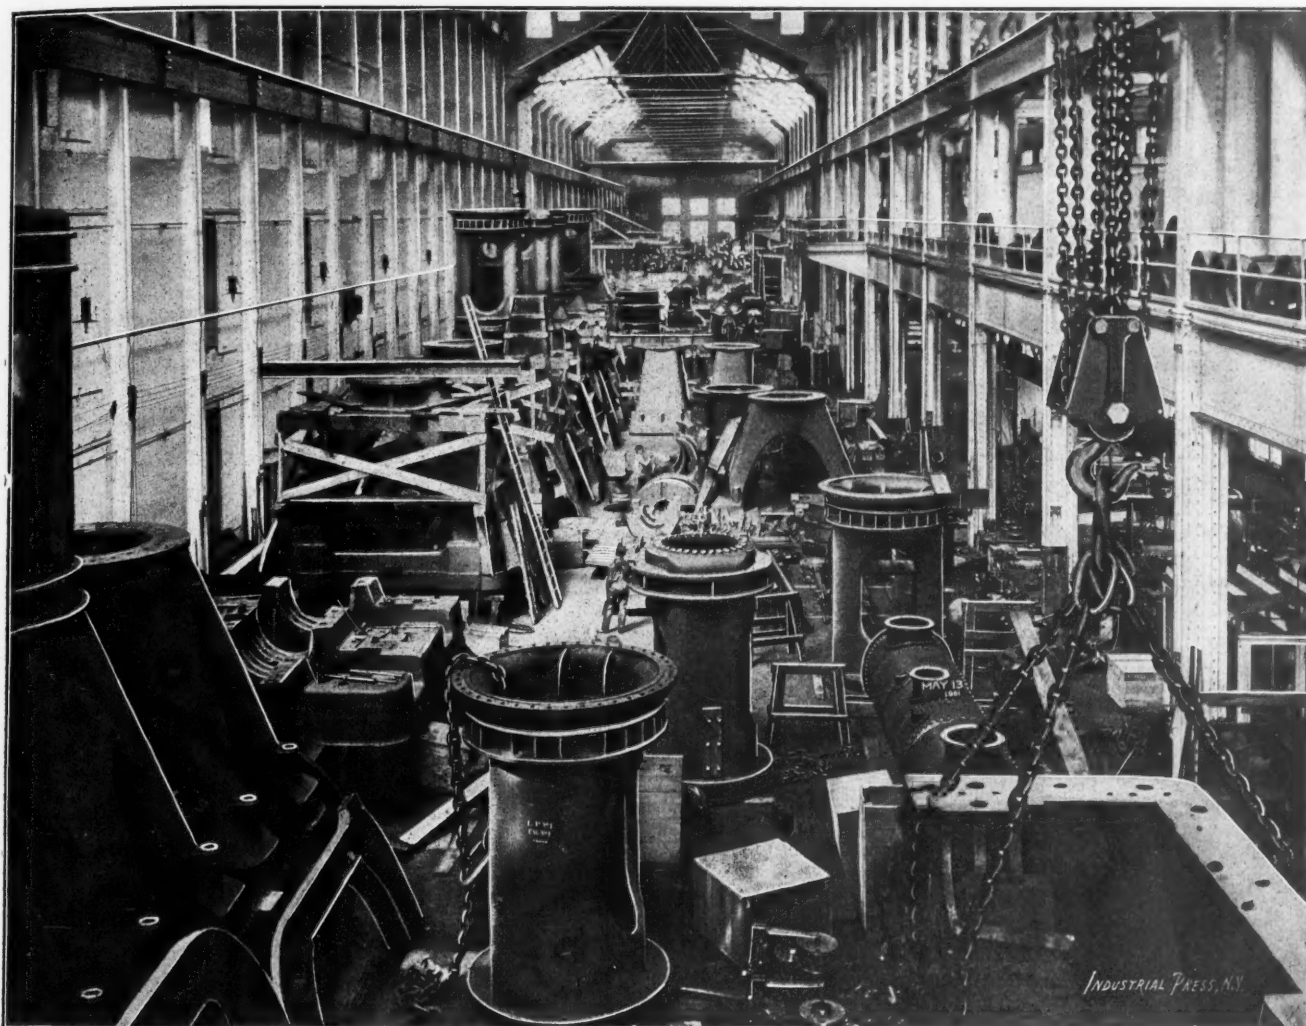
Erection Shop, looking toward the Testing Department. Traveling Crane of this Section has Clearance of Sixty Feet Beneath the Hook.
